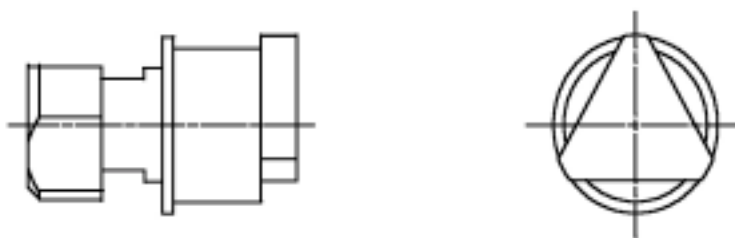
Endplug design for ATW-1 fuel rodlets.
